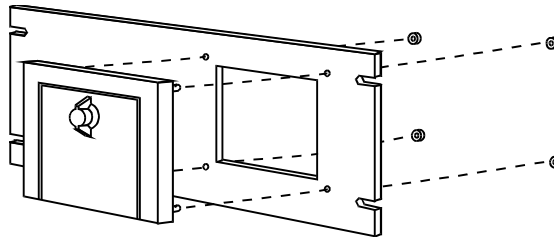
5. Mounting the Front Floppy Drive Access Door to the 9457-RFC Rack Filler with Cut-out
